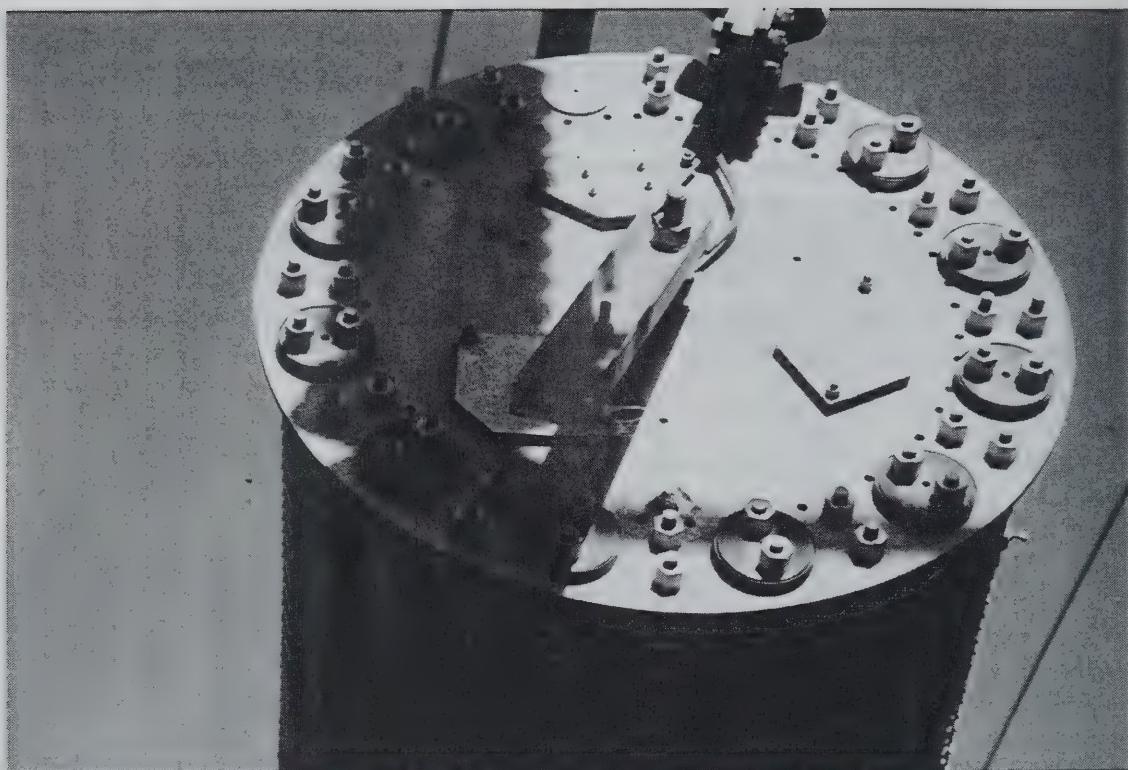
A weld of a light weight aluminum channel to a plate bolted to the cap of a post insulator failed.
